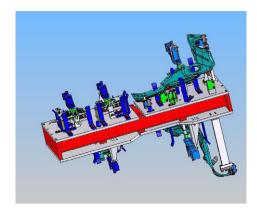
Automotive stud weld fixtures on a trunion frame, (*DBM innovation inc.*) [22].
